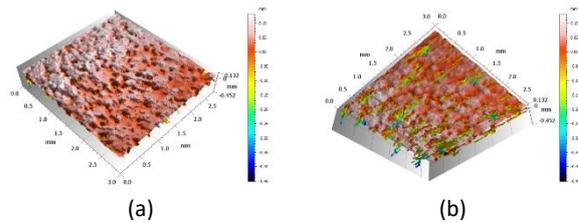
3D surface topography of Set 2 top surface: (a) top view; (b) bottom view.
